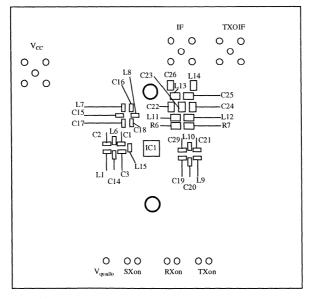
UAA2077XM Demo board - Layer 1 Assembly
